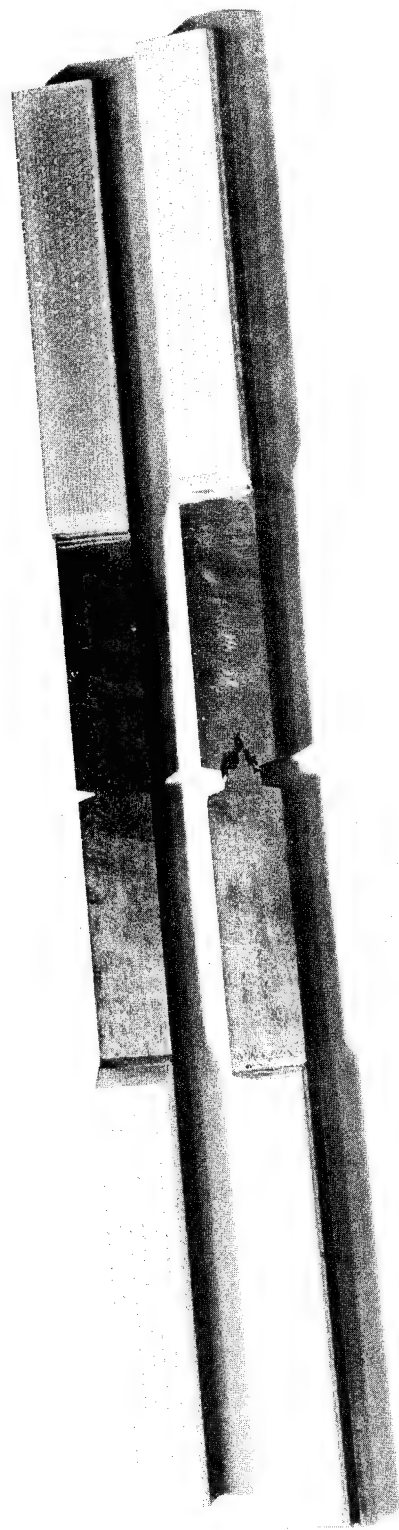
FRACTURE TOUGHNESS SPECIMENS SHOWING FAILURE MODE OF BORON
